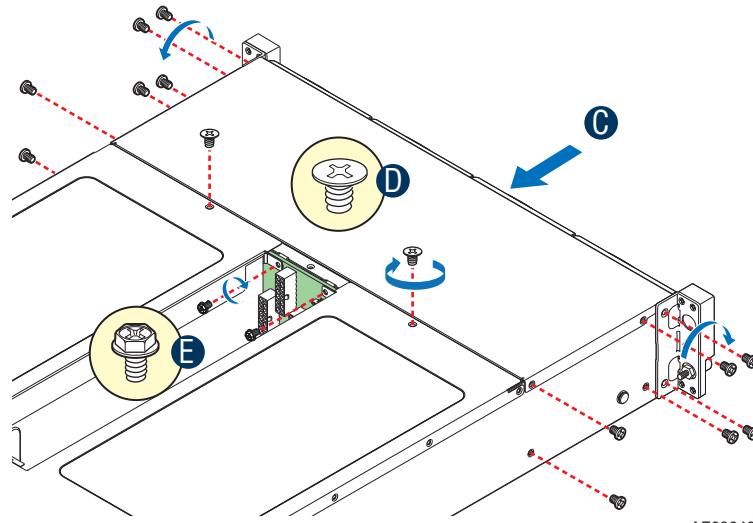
Installing the 3.5" Backplane Board to the Drive Cage
